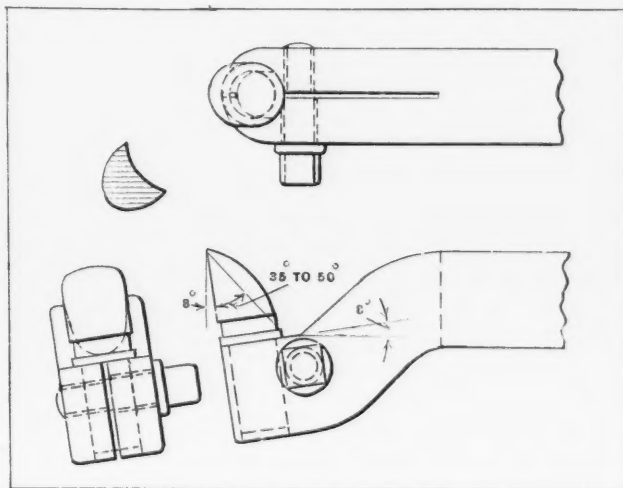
Lathe Tool Recommended for Machining Aluminum
